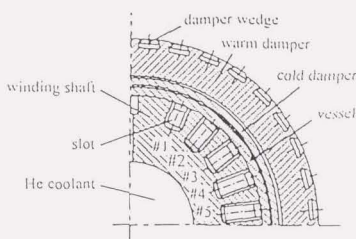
Cross-section of rotor (perpendicular to center axis, quarter of the rotor).
